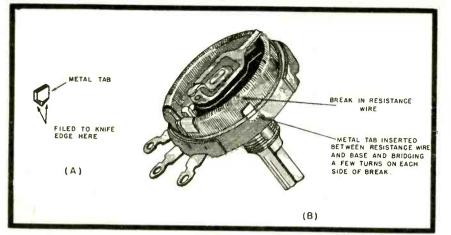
How a small metal tab may be inserted to bridge open wire in a wire-wound control. At A appears a view of the tab, that can be cut from old tube shields. The lower edge must be cut to a pointed shape and filed almost to a smooth knife edge.
